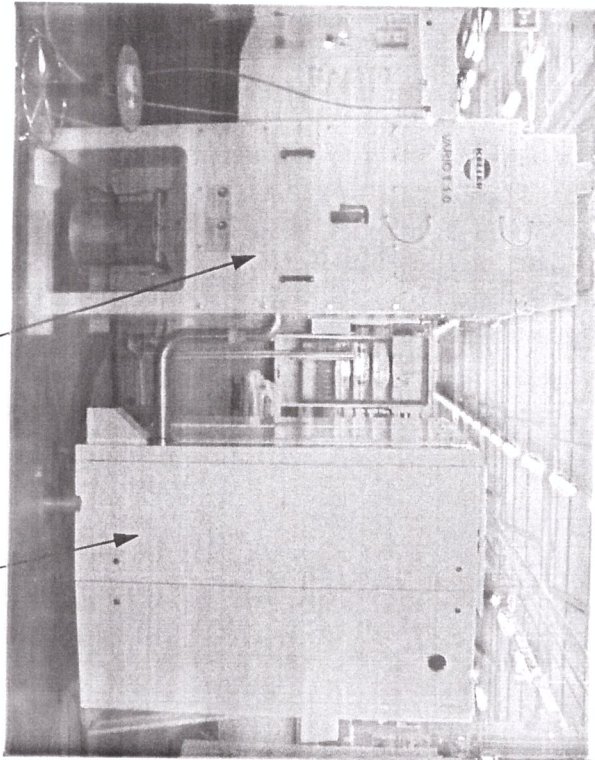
Keller Compact Separator Unit Installed On the Bacchini Laser System
